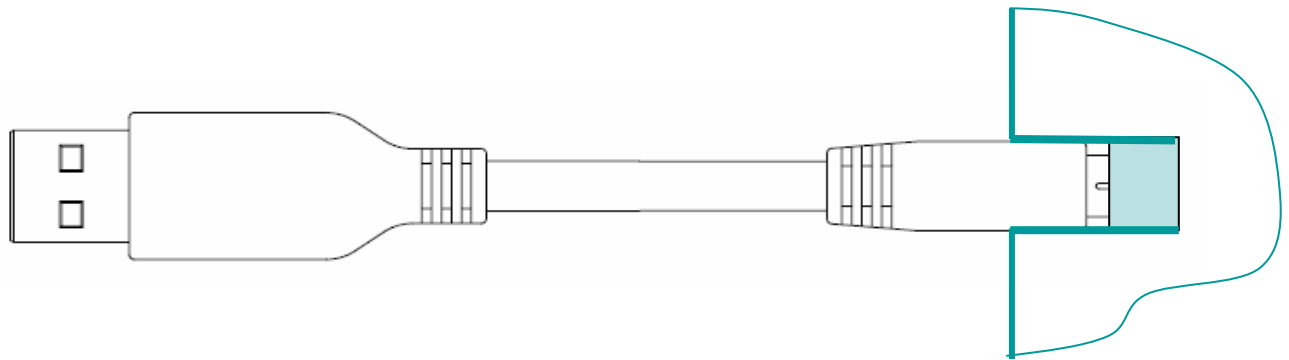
An Example to Use Bezel and Overmold to Protect Mated Connector
